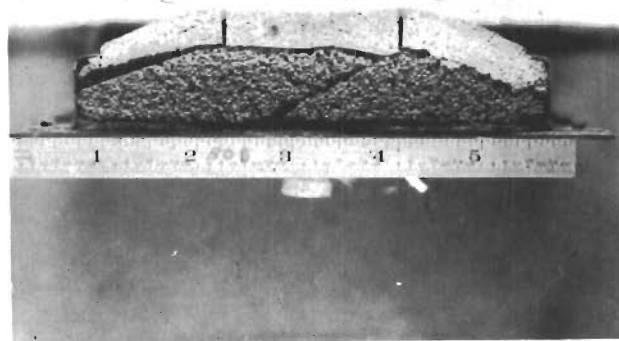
METAL SUBASSEMBLY - 4000°F TEST SPECIMEN REINFORCED CHEMICALLY BONDED DESIGN
